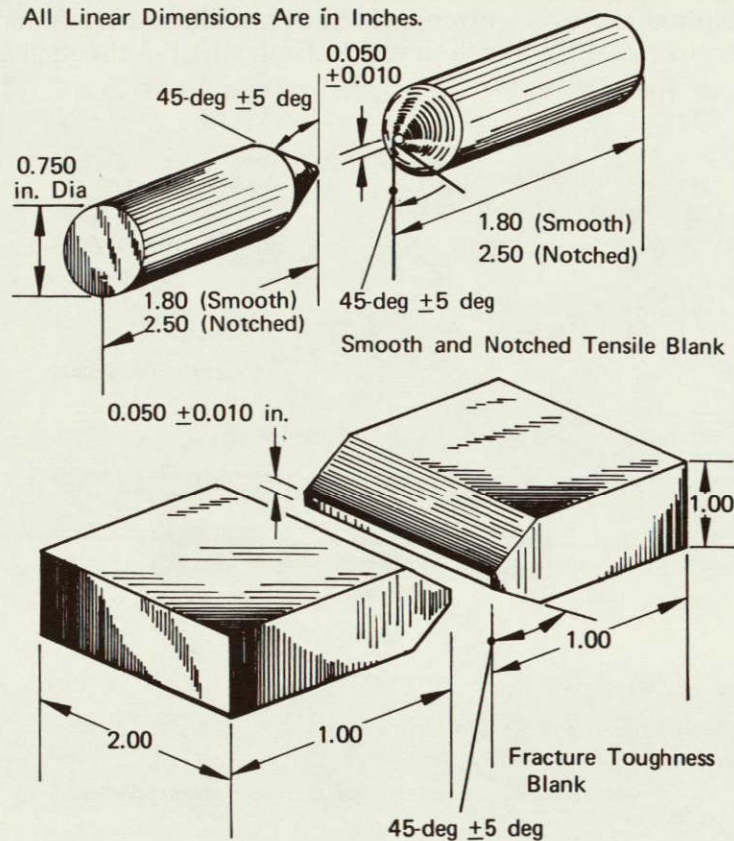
Specimen Blank Preparation Prior To Welding FD 51835
